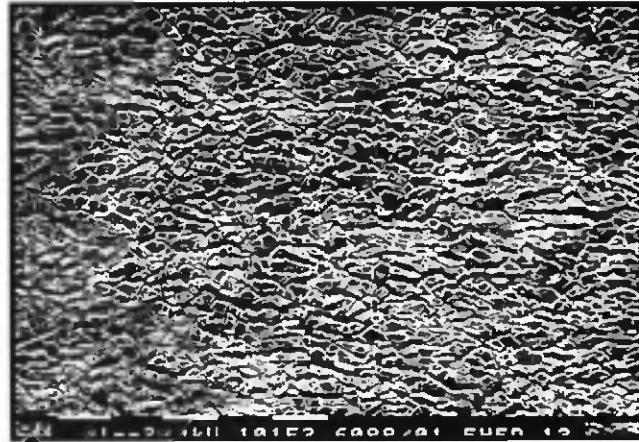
Weld interface surface after fracture, cold roll welding steel-steel with one-sided hard Cr plating (FHFD),  $Y = 0.607$ .
